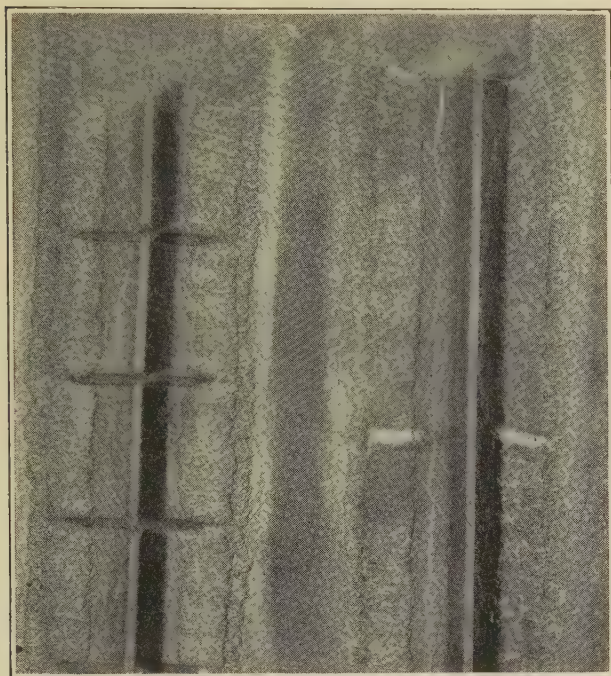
Test No. 4, after completion of welding and before test to destruction.
